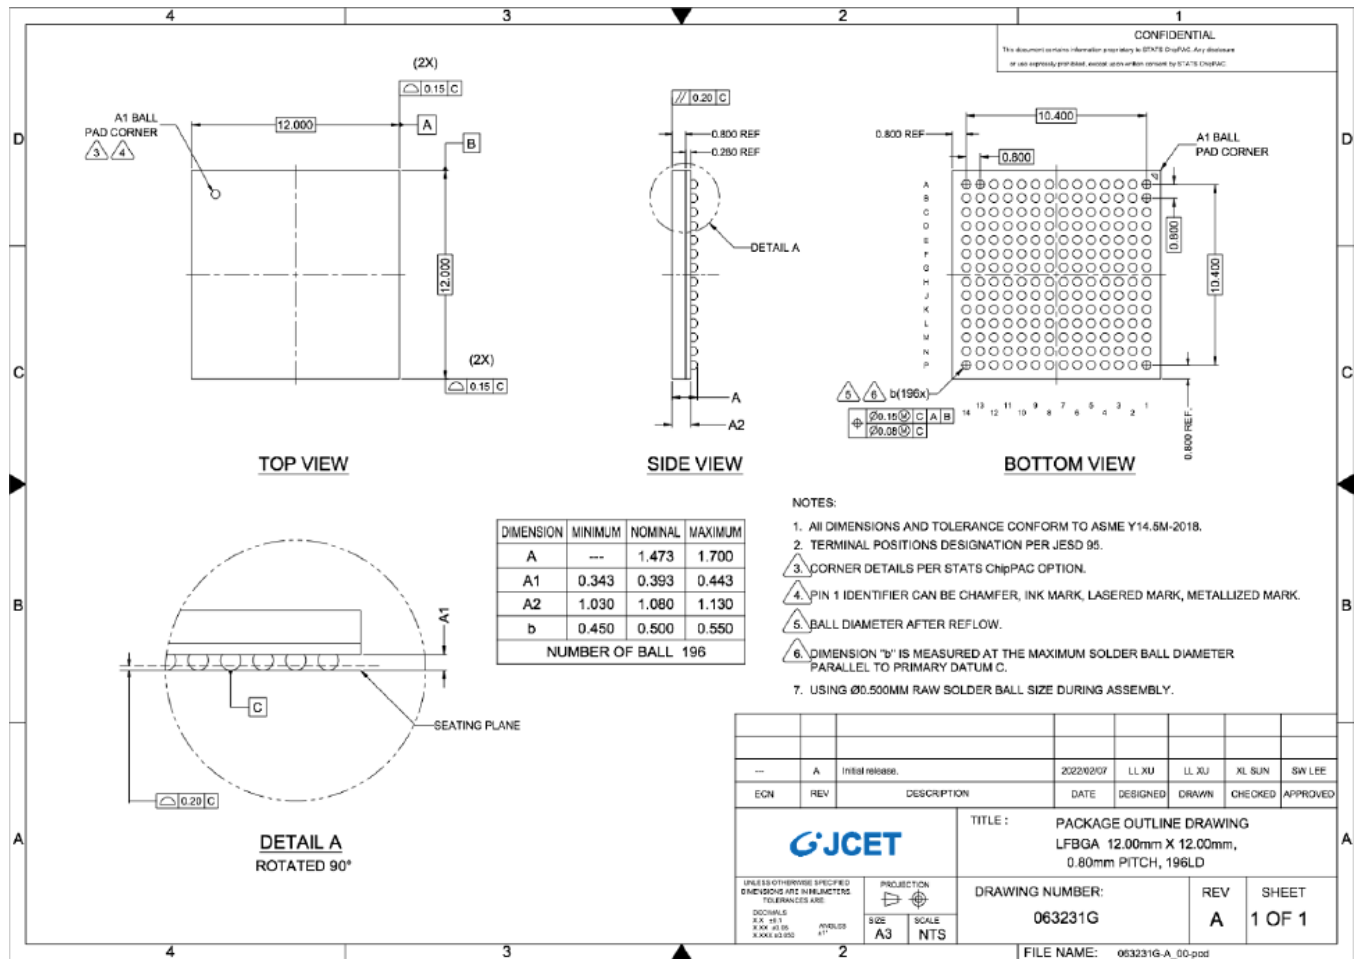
Mechanical drawing of the BGA package of ALFE2.
